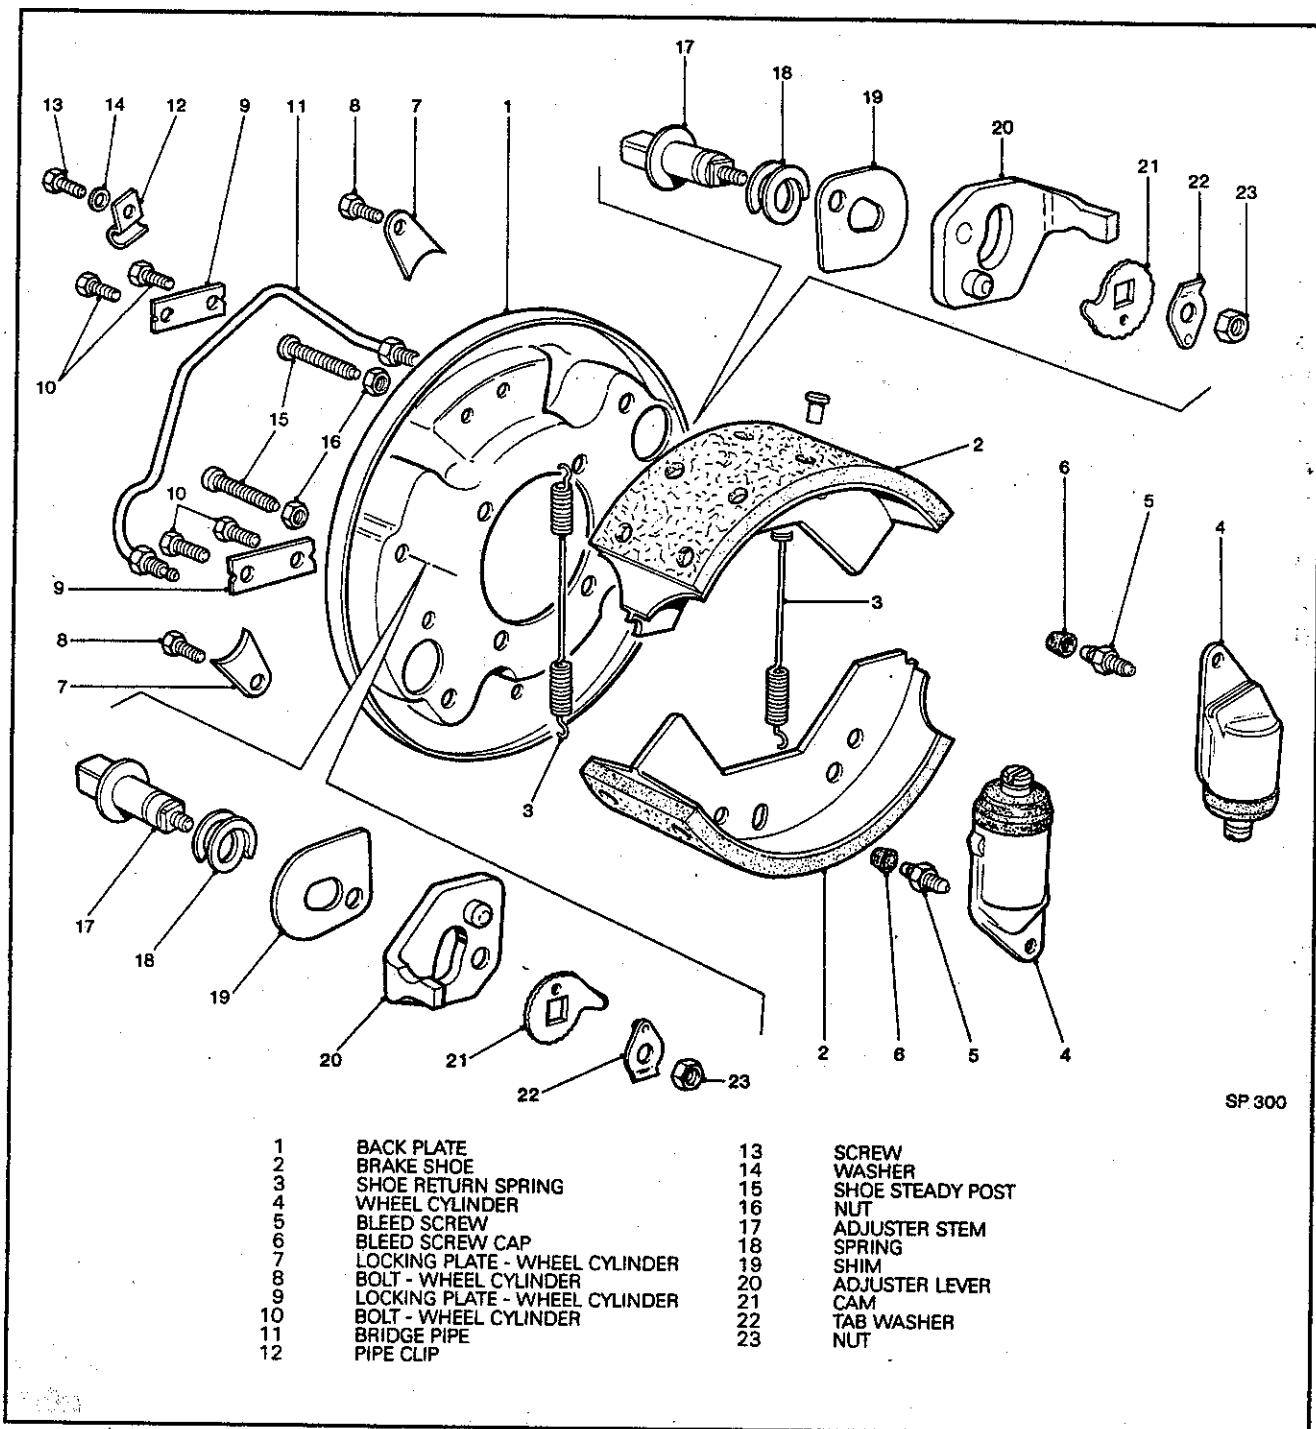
Exploded view of 13 x 5 HLSS Front brake
